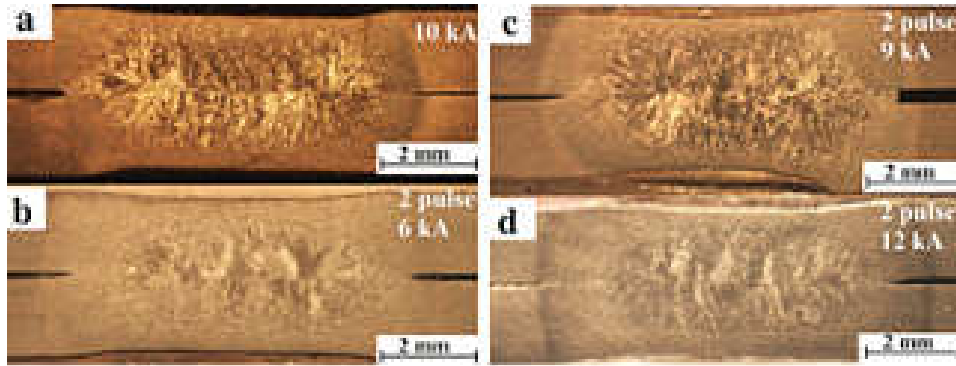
Macrographs of the cross sections of the resistance spot welded samples (a) W1, (b) W2, (c) W3, (d) W4.
